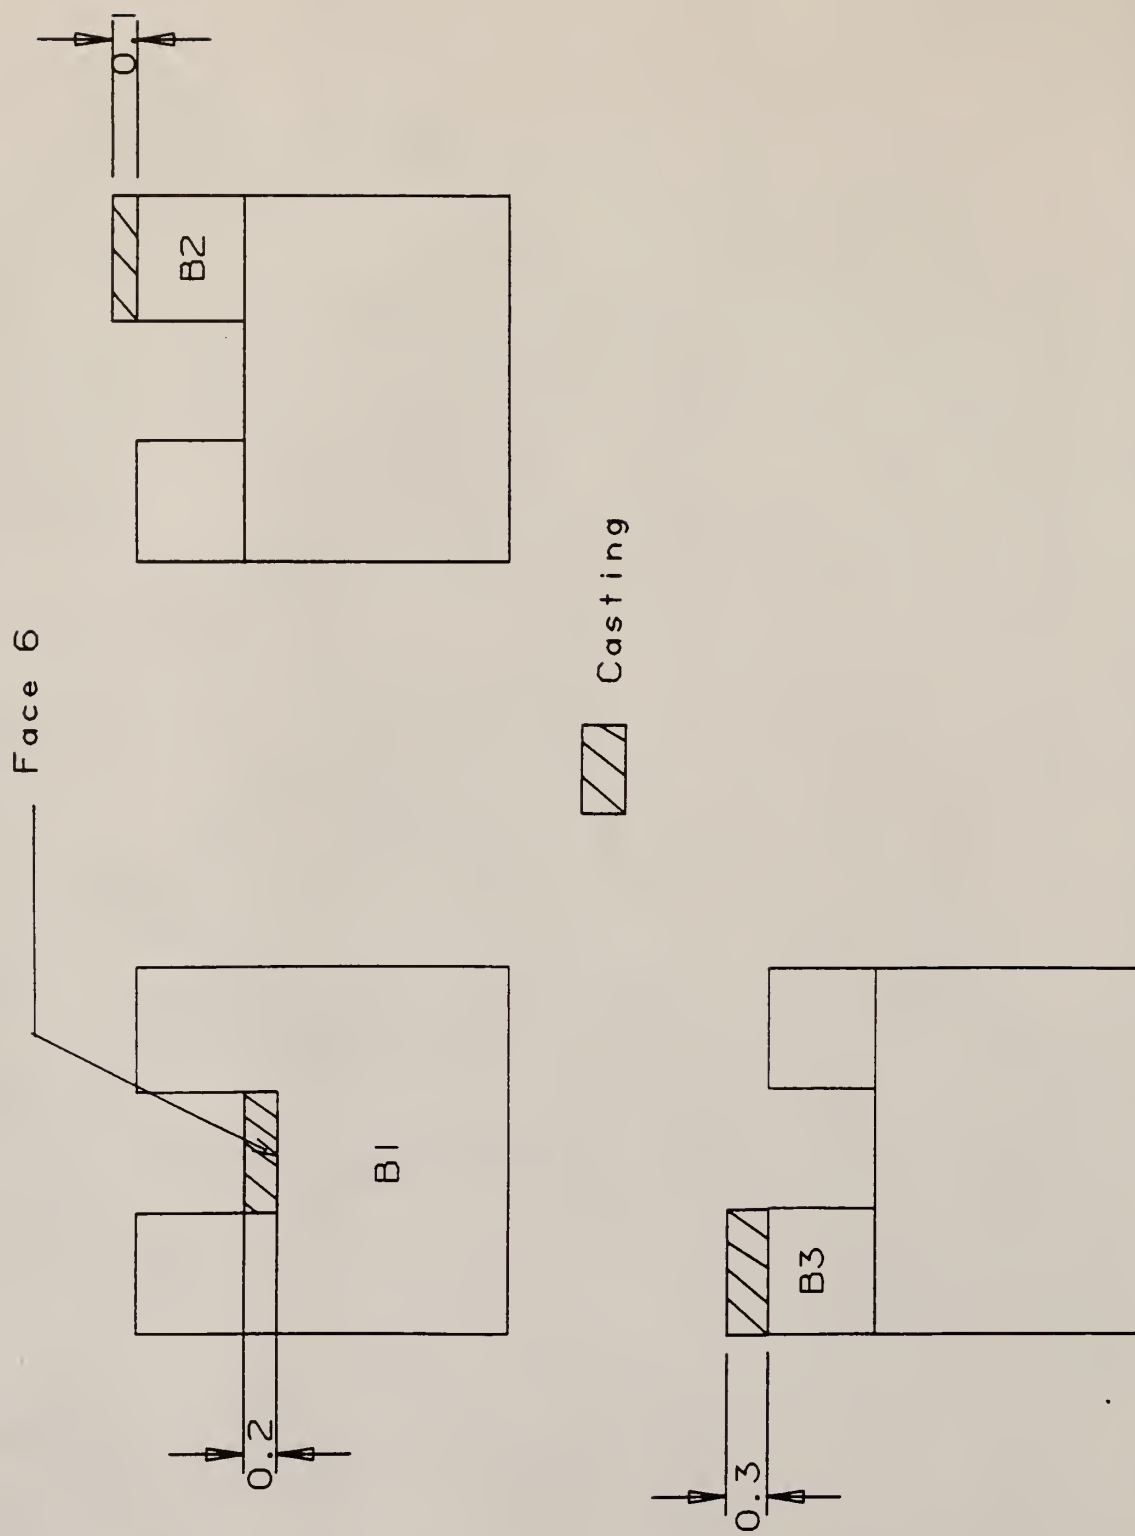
EXAMPLE 1 - SPECIFYING CASTING THICKNESS
